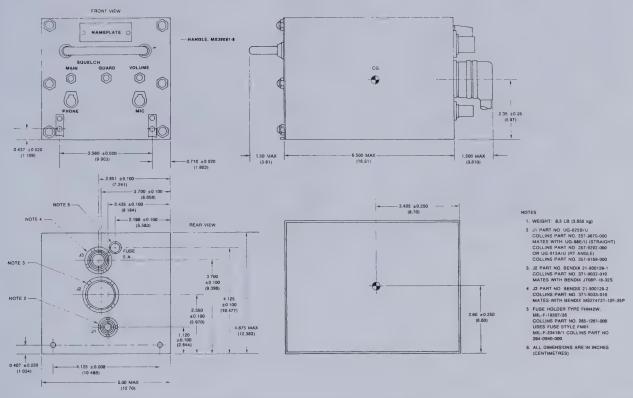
RT-1150/ARC-159(V) Receiver-Transmitter, Outline and Mounting Dimensions
